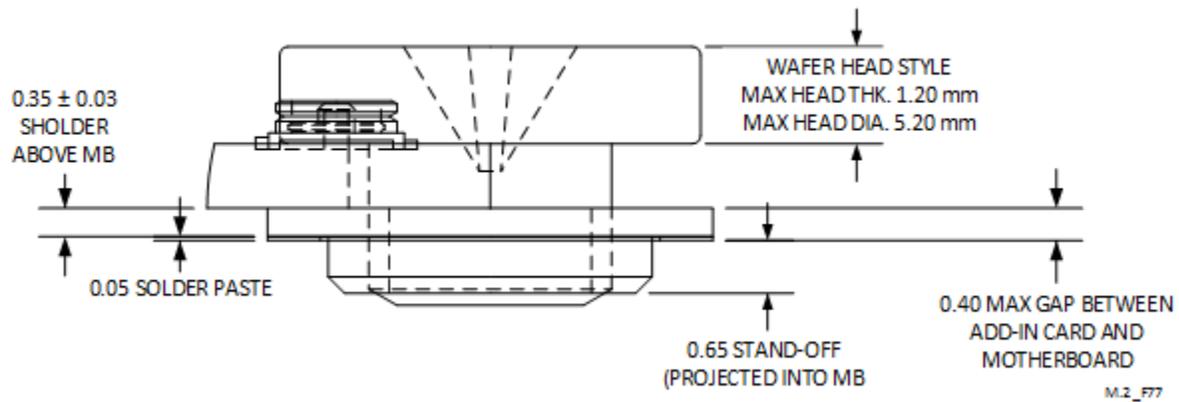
Single-sided Top Mount Solder-down Stand-off
